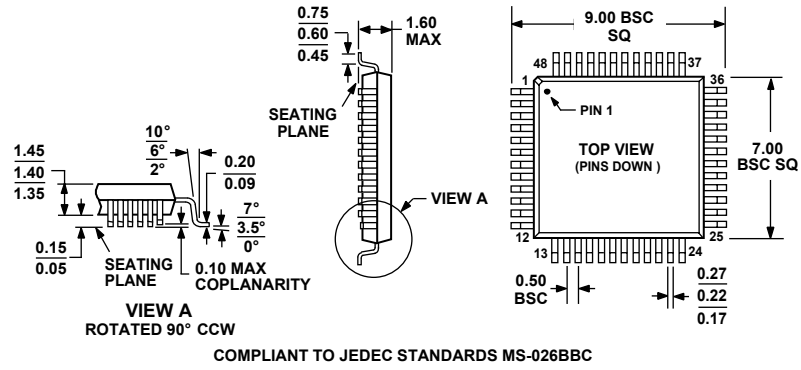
48-Lead Quad Flatpack (LQFP) [ST-48]
